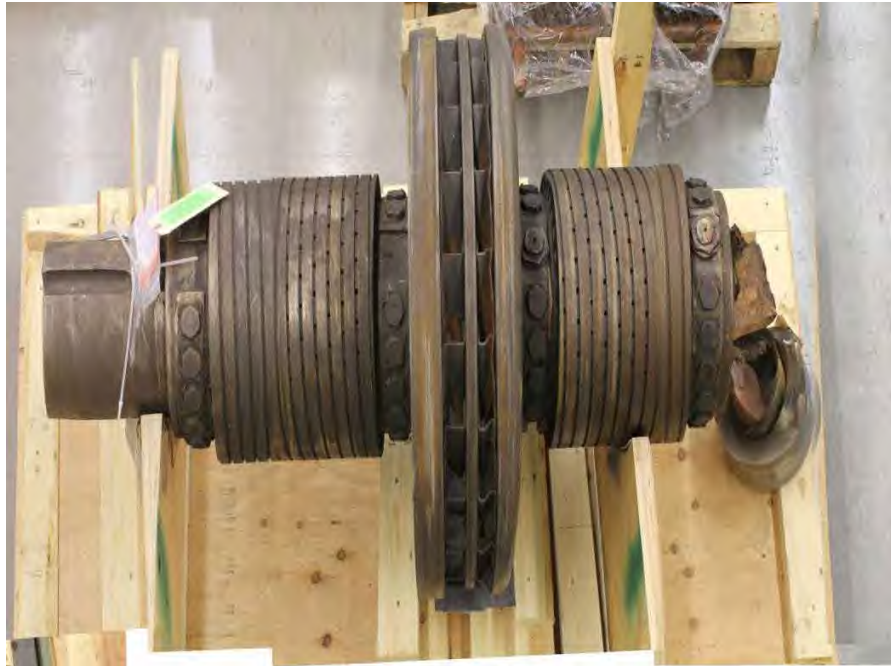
Aft end of generator shaft which fractured transversely just forward of the generator collector ring.
